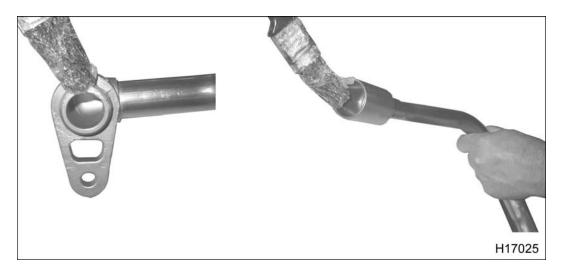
Brushing lubricant and sealant onto pilot end (left) and adapter end of EGR coolant return tube (right)
